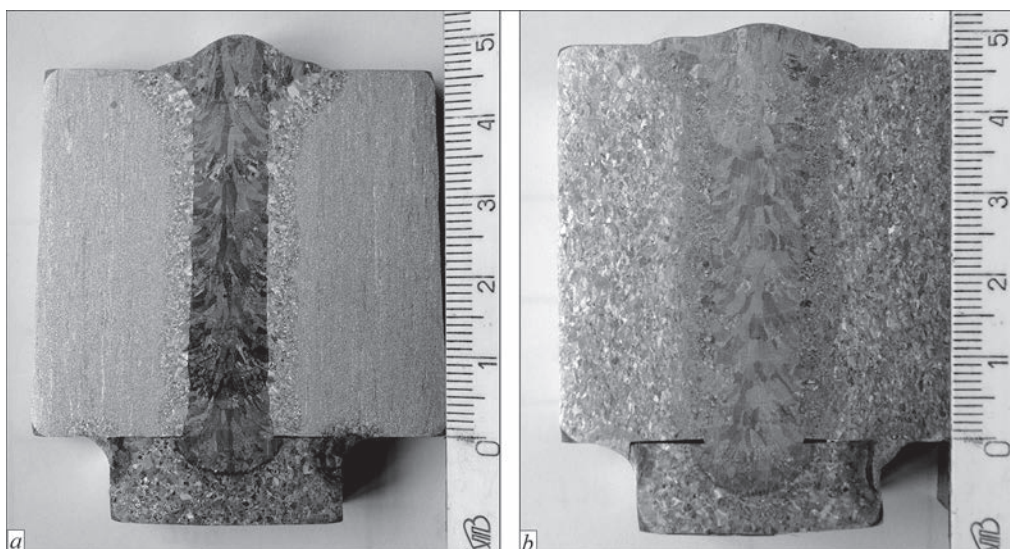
Transverse macrosections of welded joints of 45-mm-thick PT-3V titanium alloy produced by NGW: *a* — using SPT2 filler wire; *b* — using 2V filler wire
